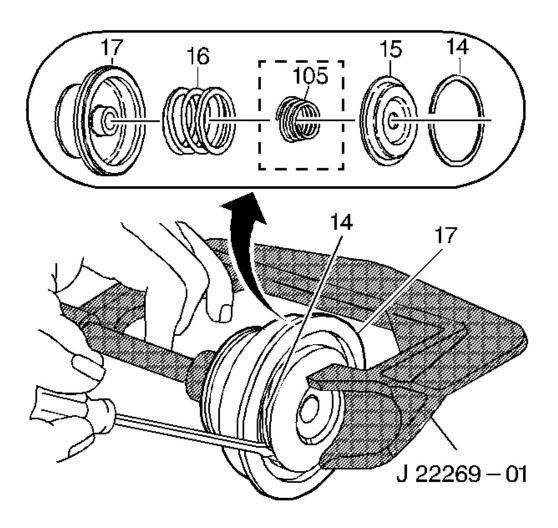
Compressing Second Apply Piston Assembly Using J 22269-01 Courtesy of GENERAL MOTORS CORP.
